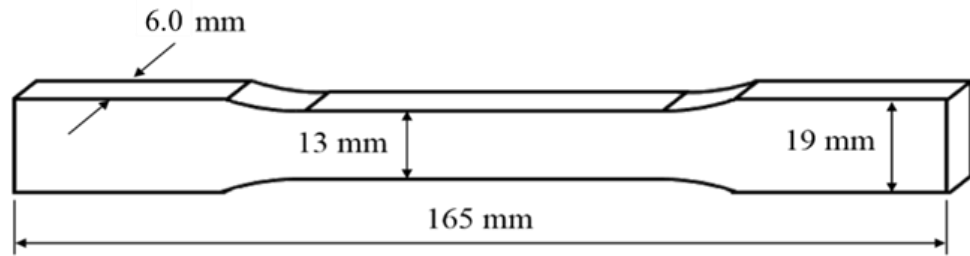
Specimen geometry for ASTM D638-14 uniaxial tensile test.
